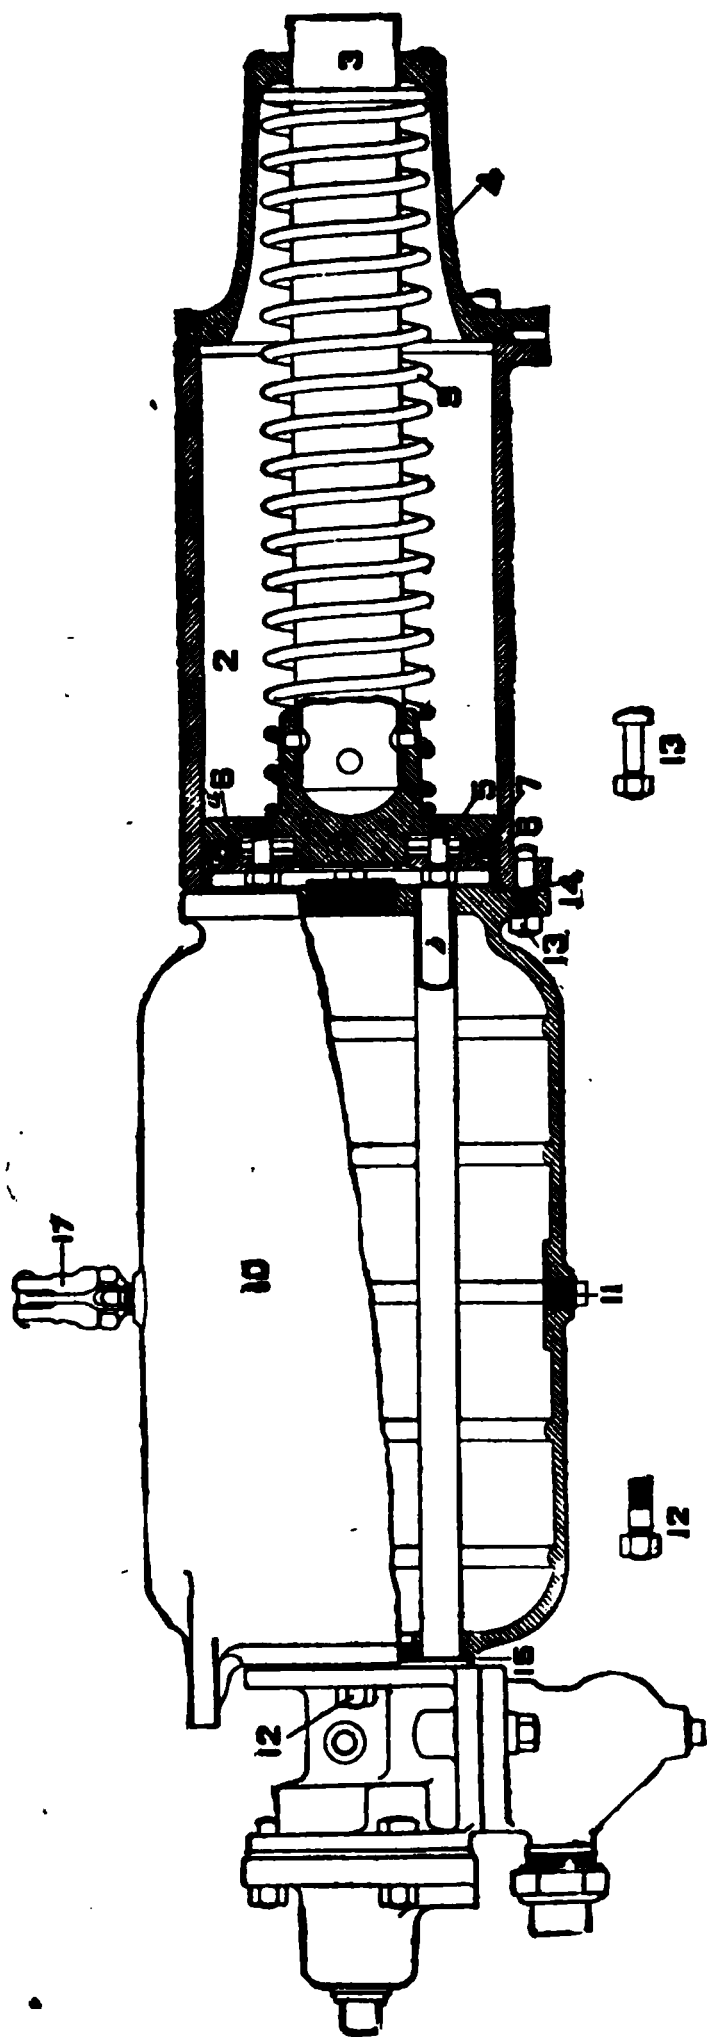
TRIPLE VALVE, AUXILIARY RESERVOIR AND BRAKE CYLINDER COMBINED
